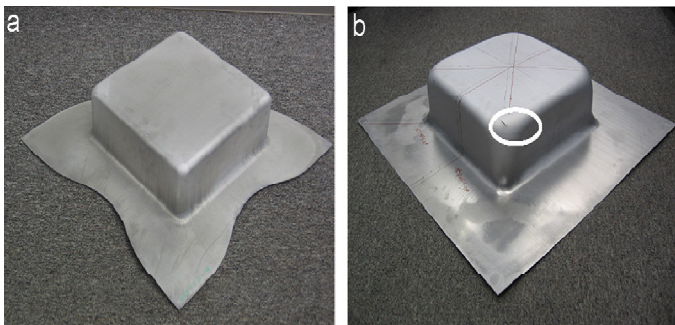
Formed part of SPF5083 using (a) HDMP-SPF and (b) gas forming only [12]
